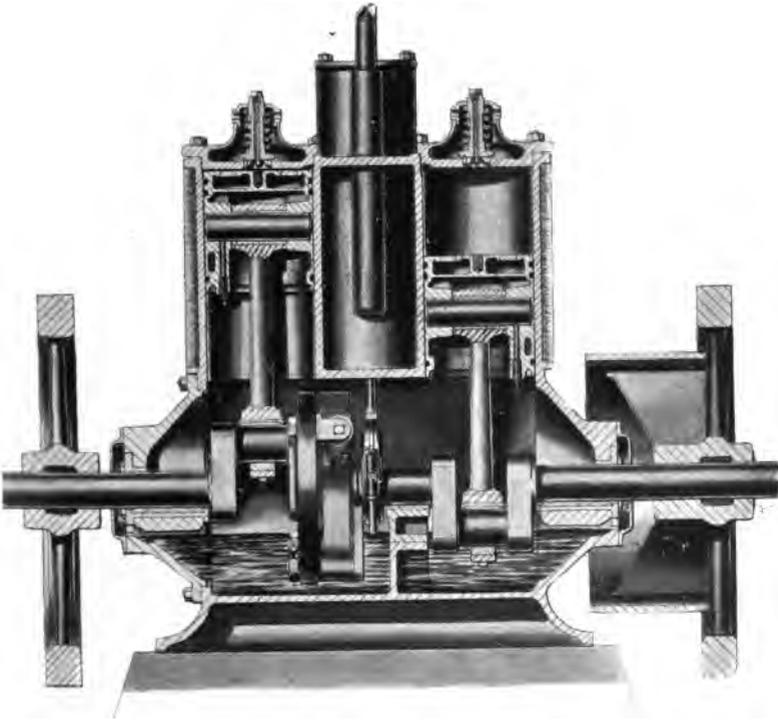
"SENTINEL" CLASS "C" SIMPLE ENGINE—LONGITUDINAL SECTION THROUGH CRANK SHAFT.
